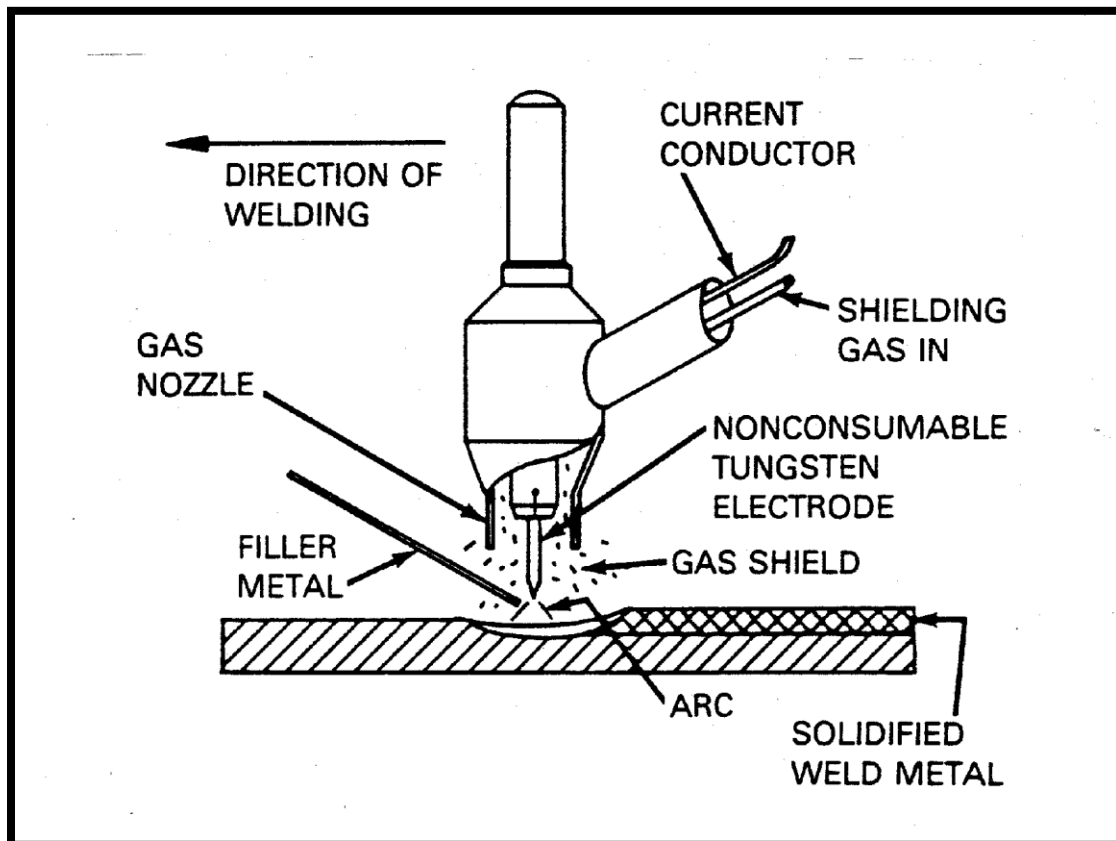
TIG Welding – EPA AP-42 (Henning)
